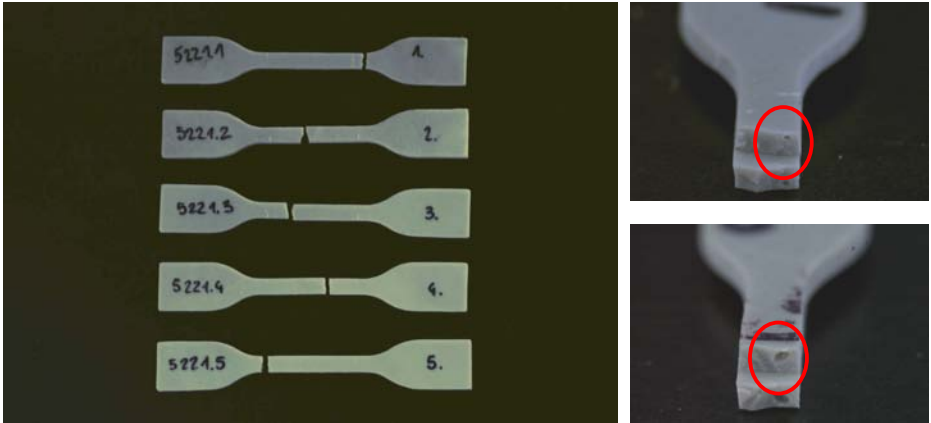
ADP (a) tensile specimens after failure; fracture surfaces (b) ADP-T.3, (c) ADP-T.4 (5 mm/min)
